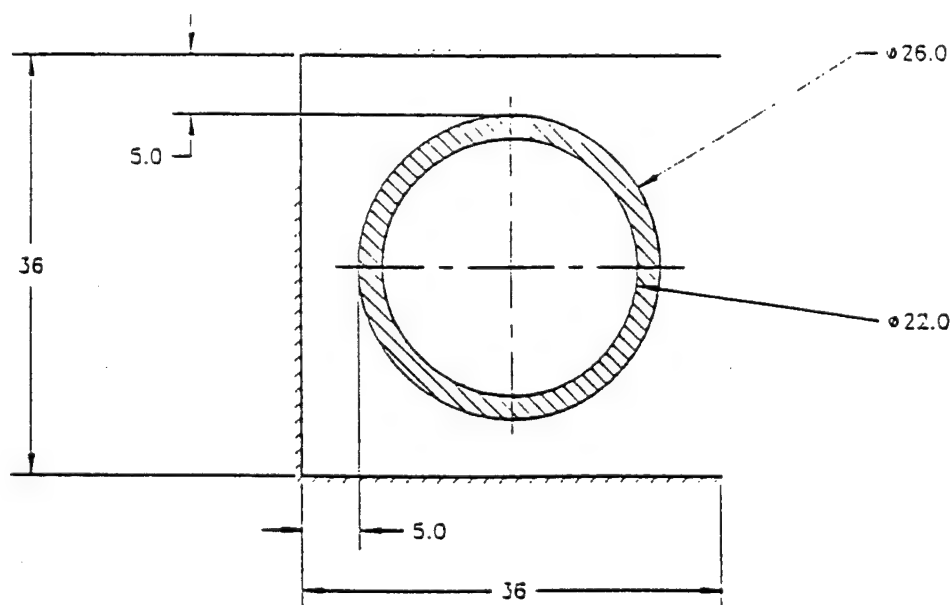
Top View of Model Geometry at Section C-C (all dimensions are in centimeters)
